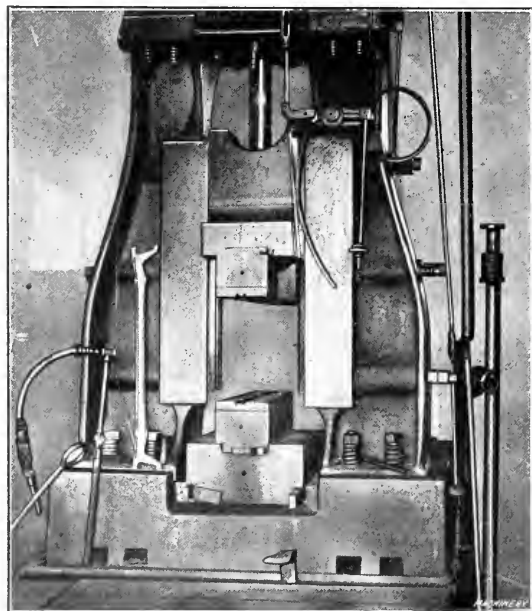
"Massillon" Steam Hammer used for bringing the Ford Front Axle to Final Shape
